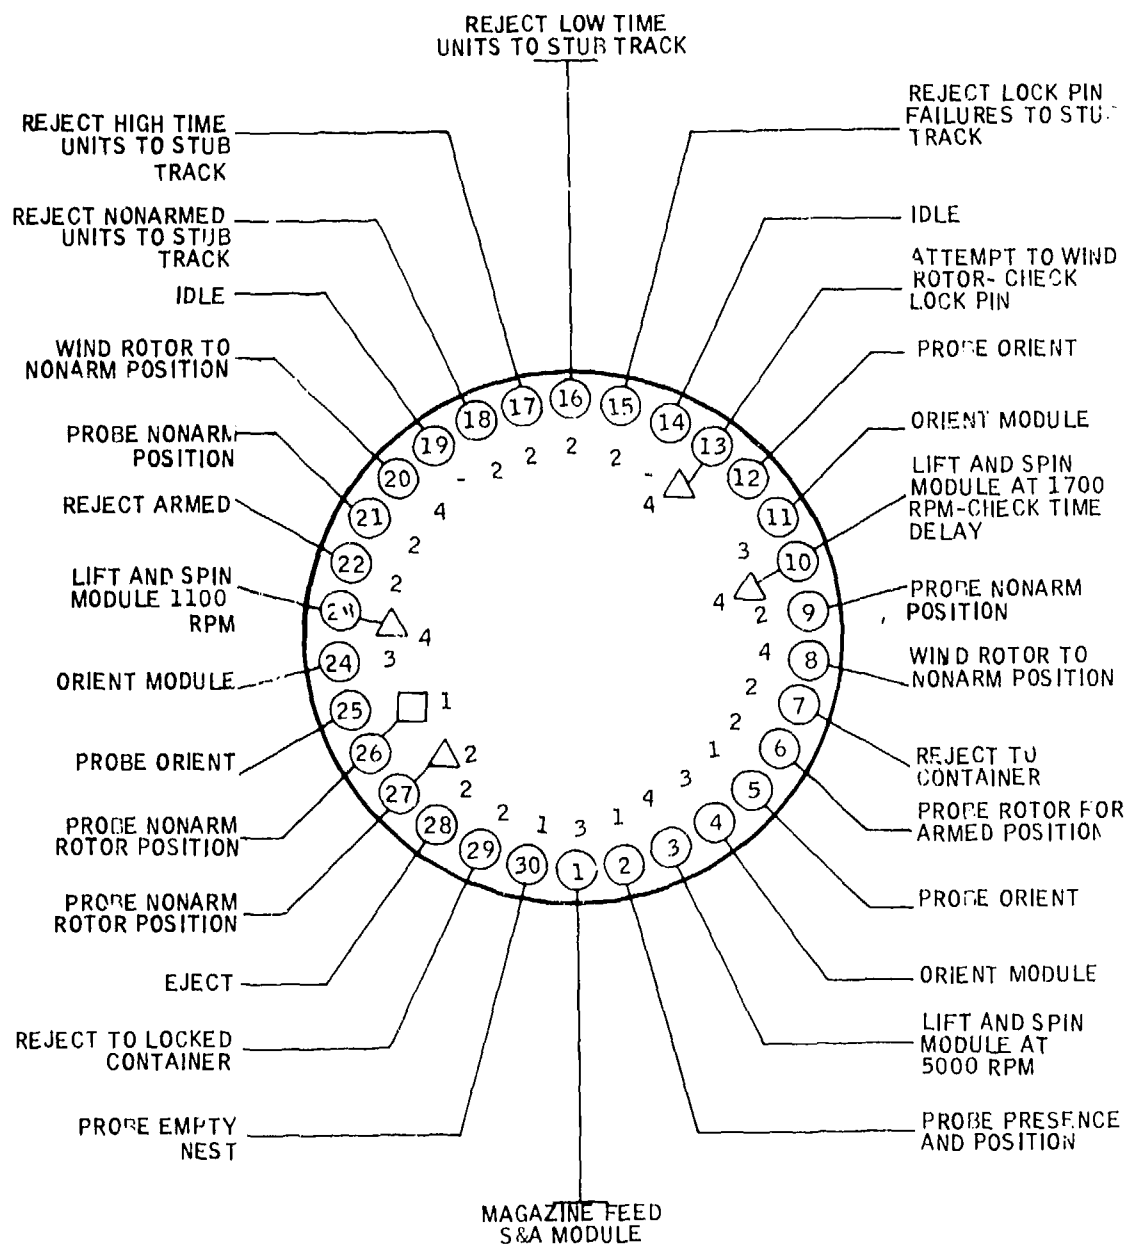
Dial schematic, machine S9 - S&A module assembly operation 1
